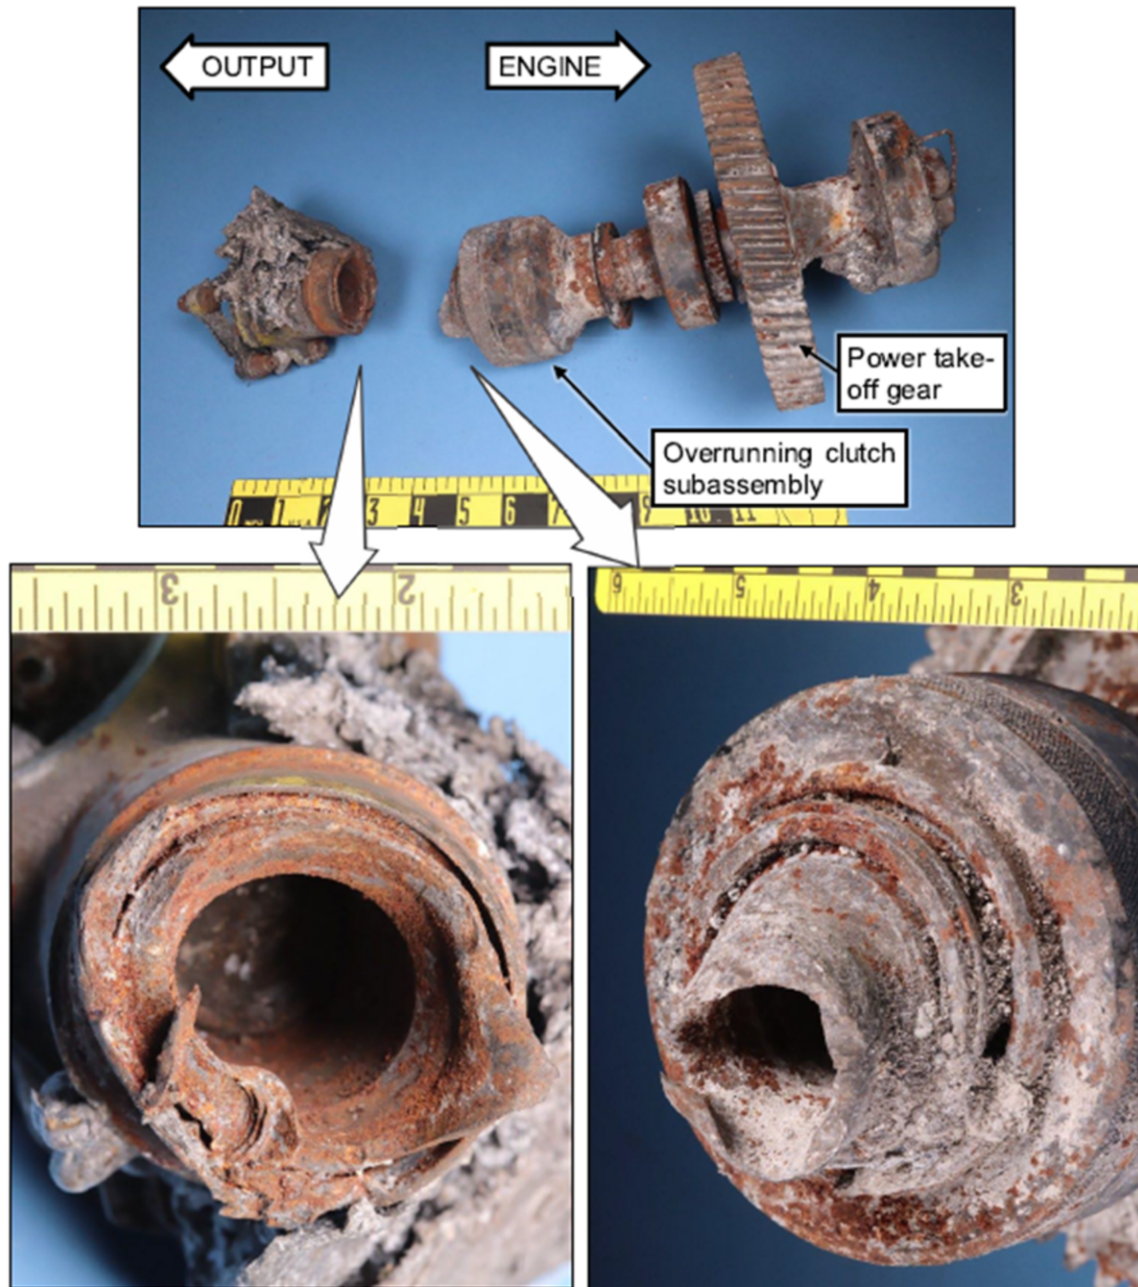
Separation of the inner race output shaft of the overrunning clutch subassembly.
